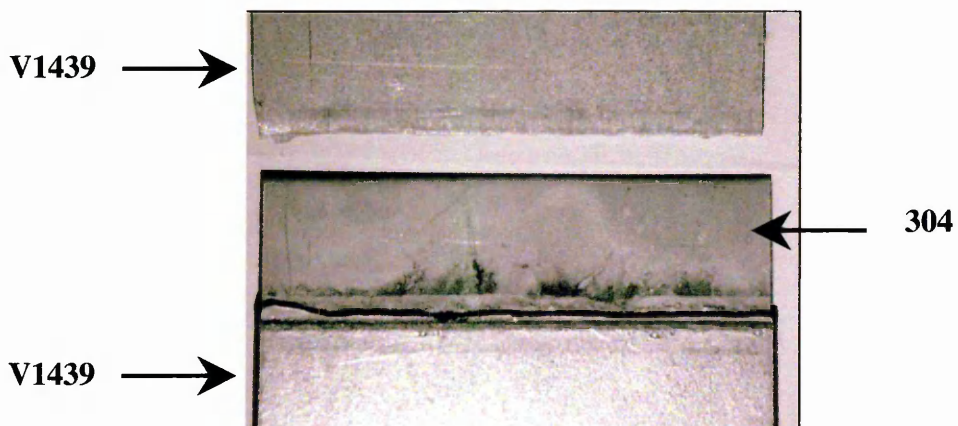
Shows a fatigue specimen in which fatigue failure occurred in the V1439
